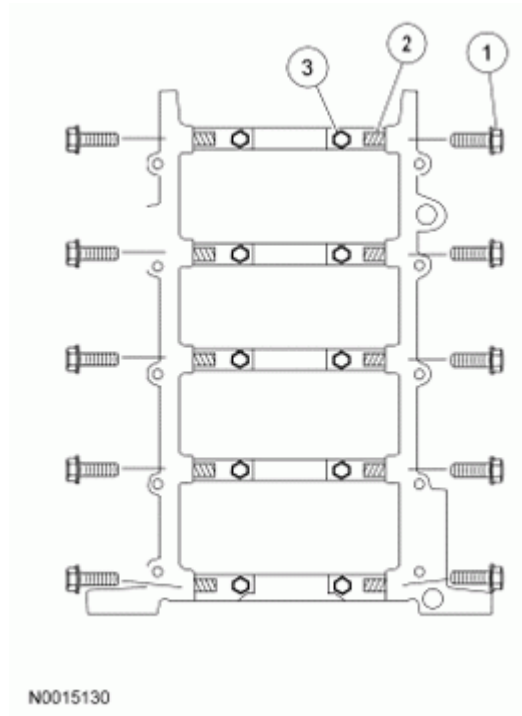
Identifying Crankshaft Bearing Cap Fasteners
